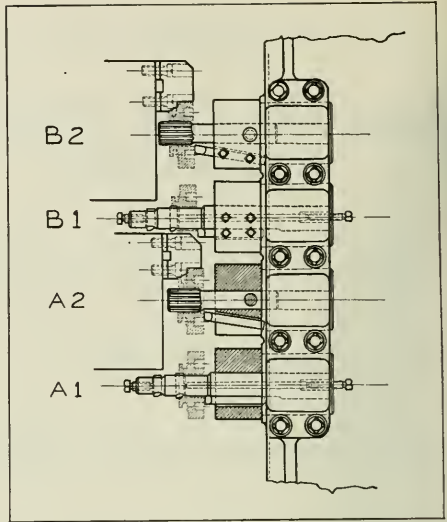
Tooling Equipment for machining a Transmission Gear on a Double-spindle Production Lathe
